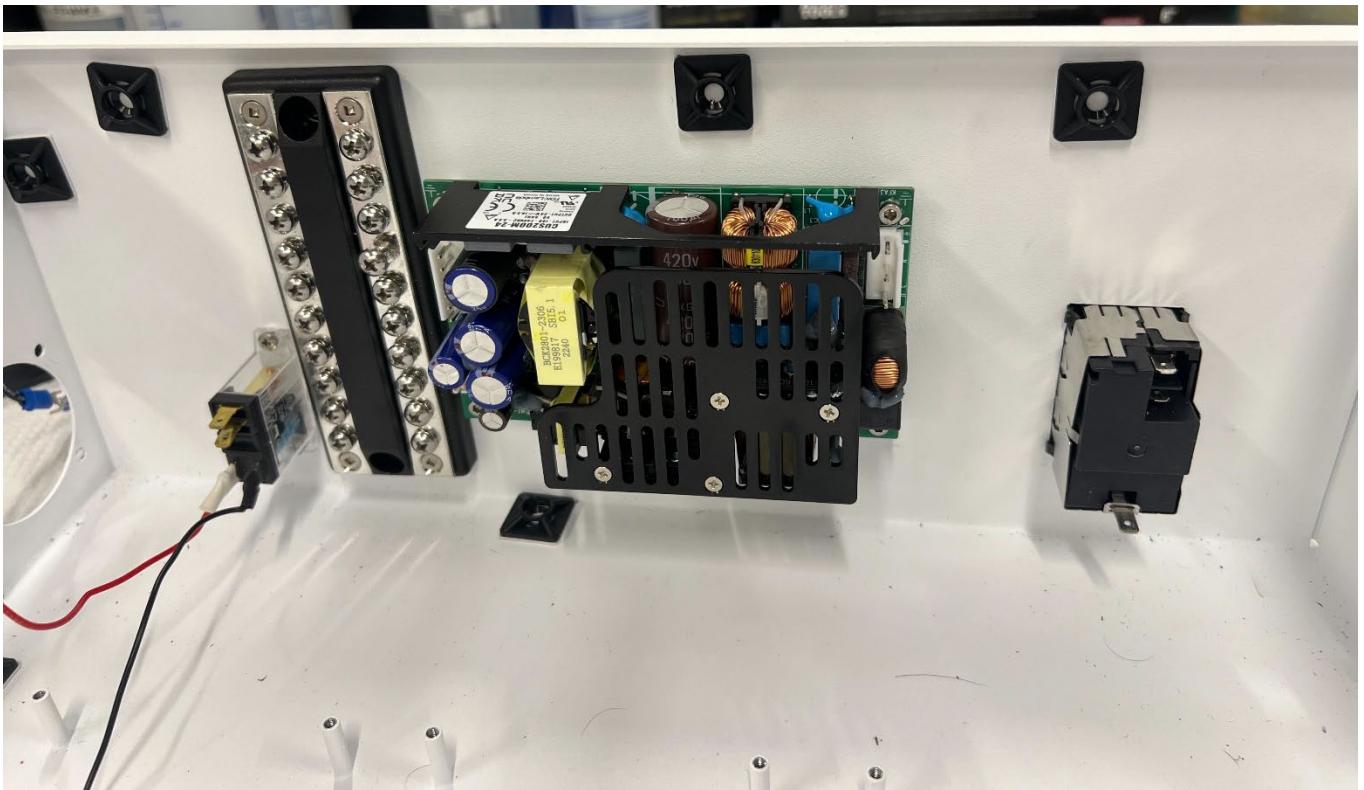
Mounting locations for AC Power Input Module, DC Power Supply, Terminal Bus Block, and Relay
